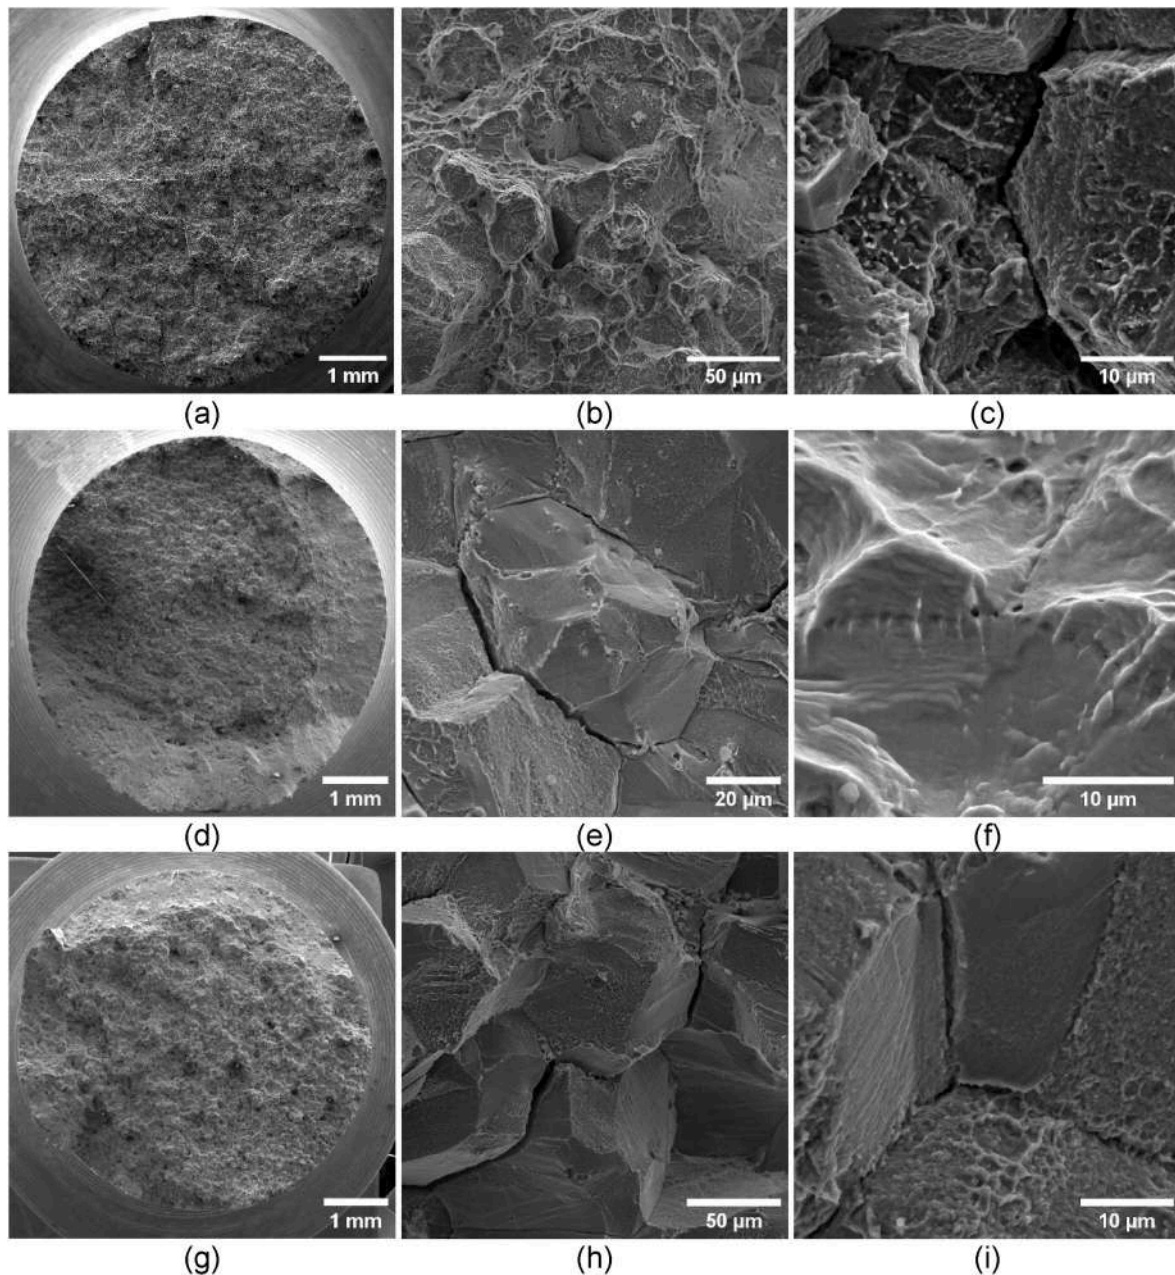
Fractographs of the creep specimens of alloys A, B and C. Alloy A: (a–c). (a): general view of the fracture; (b): mixed fracture mode (dimples and intergranular); (c): detailed view of the intergranular fracture, with reminiscent ductility on the facets; alloy B (d–f); (d): general view of the fracture; (e): detail of the intergranular fracture with very shallow dimples and secondary cracks; (f): detailed view of the region with dimples, with microvoids formed along grain boundaries; Alloy C (g–i). (g): general view of the fracture; (h): intergranular fracture, with secondary cracks; (i): detail of the intergranular fracture with shallow dimples and slip bands over the facets.
